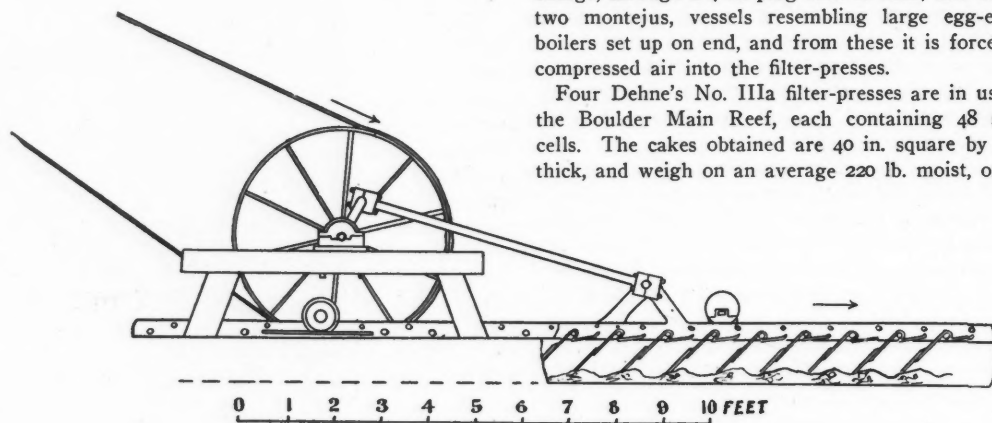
PUSH CONVEYOR, BACKWARD STROKE.
